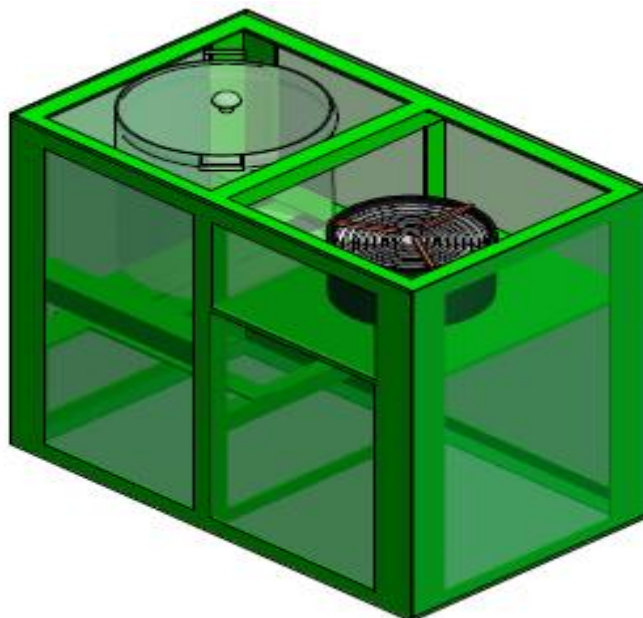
Isometric (Assembling) view of Yam Pounding Machine
